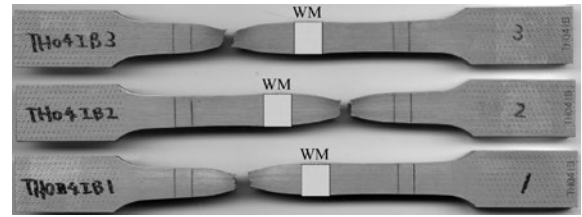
Appearance of tested specimens of one pass both side weld beads by hybrid welding of pure titanium plate of 12 mm in thickness at 10 kW, 150 A, 2 m/min and $f_d = -12$ mm.
